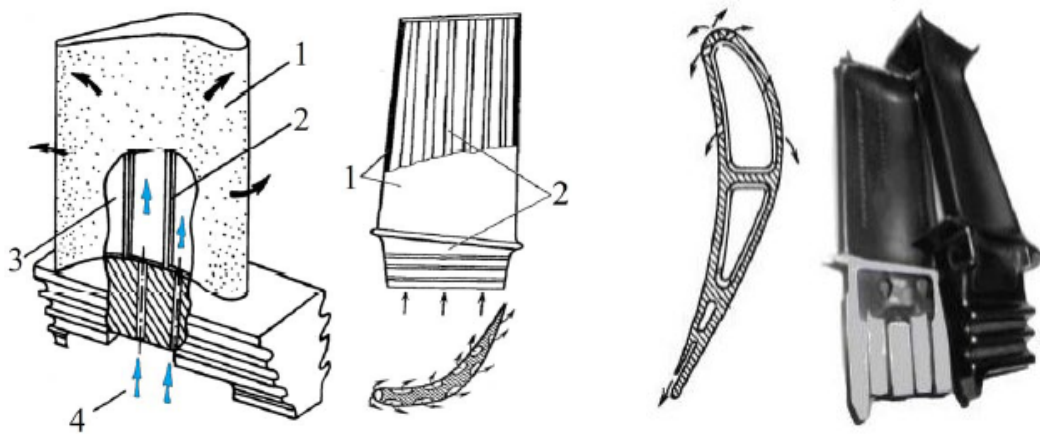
Gas turbine blades with porous (left) and convective film (right) cooling (1 - porous shell; 2 - bearing rods; 3 - air cavities; 4 - air supply channels)
